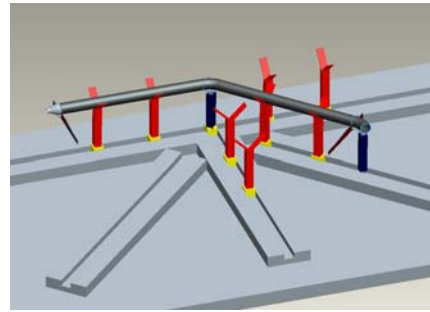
Illustration of the flexible fixtures developed in demonstrator 2
